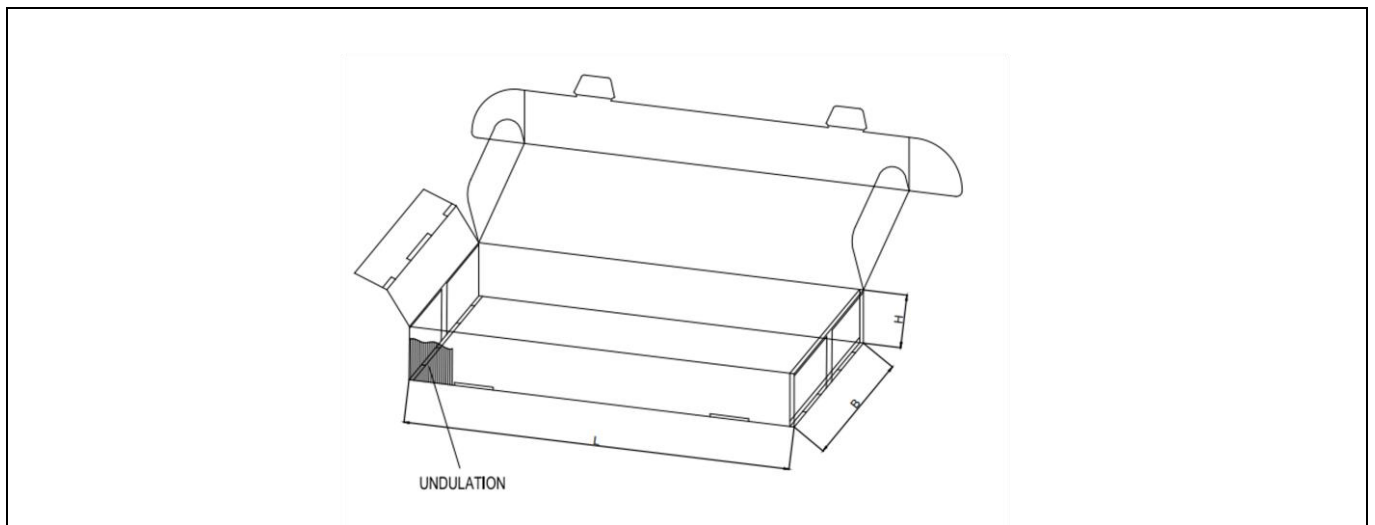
Dimensions of packing boxes for tubes: L=555mm, B=151mm, H=96mm
